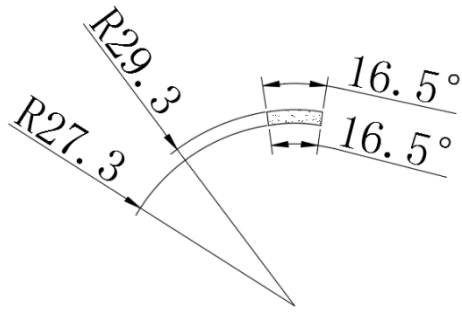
PM dimensions for 6/14 CPM-FRPM machines.
